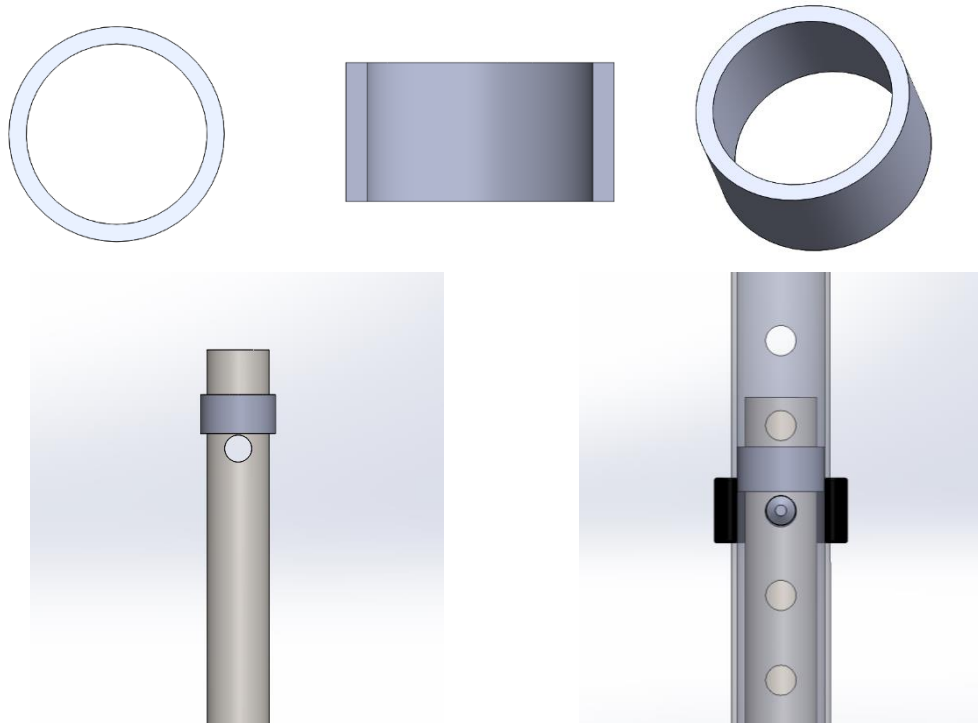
Configuration of the stabilizer ring fixed to the lower rod of the cane; top view, sectional view and trimetric view of the stabilizer ring on the top row, respectively.
